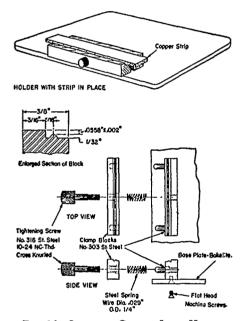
OPTIONAL COPPER STRIP HOLDER
